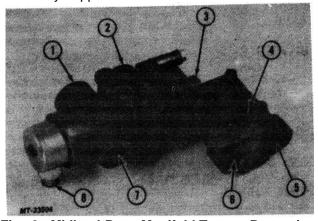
Midland-Ross Manifold Tractor Protection Valve
